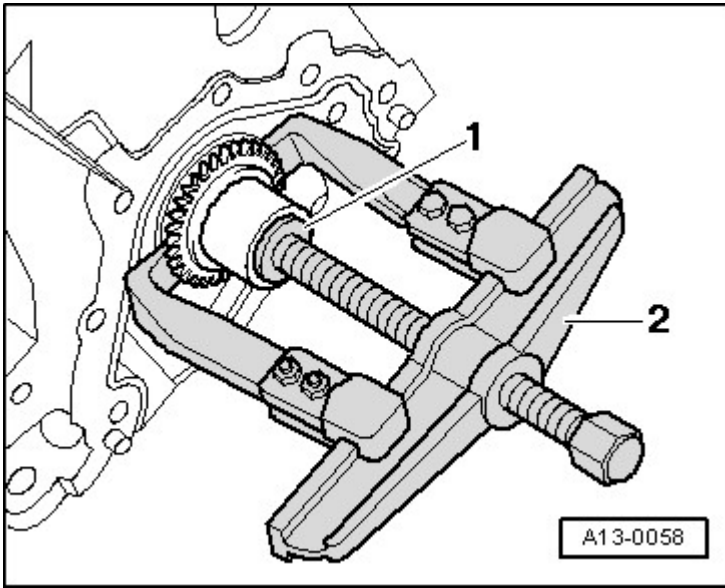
Pulling Off Chain Sprocket From Crankshaft
